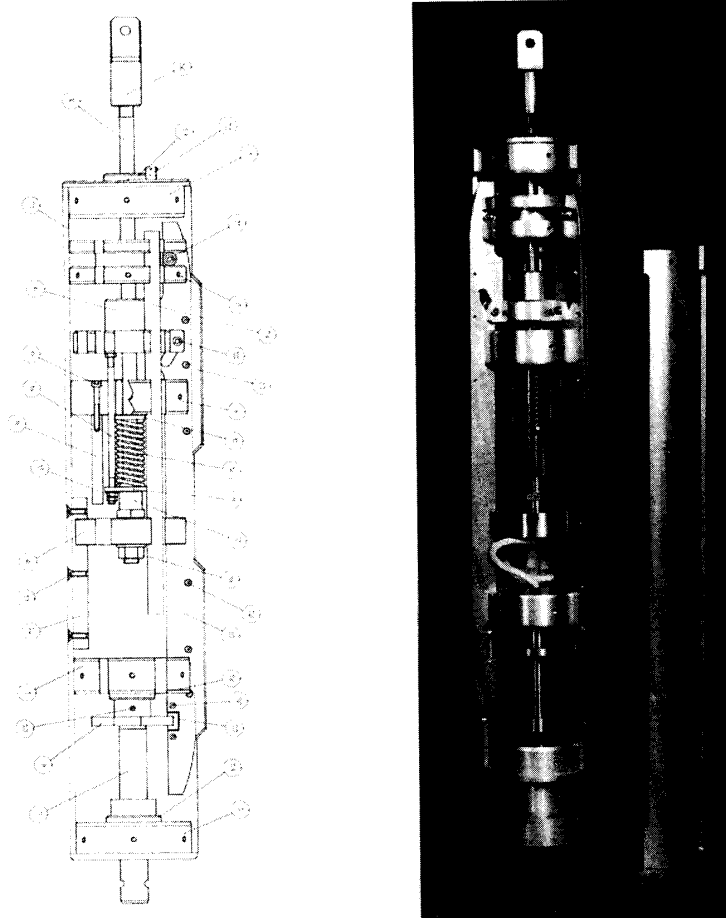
Anti-torque section (blades shown in drawing, but missing from image).
